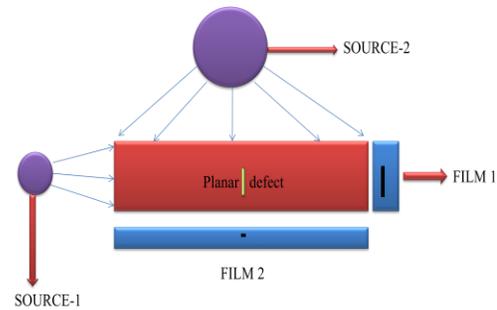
side view of weld sample for multi-shot examination in radiography
